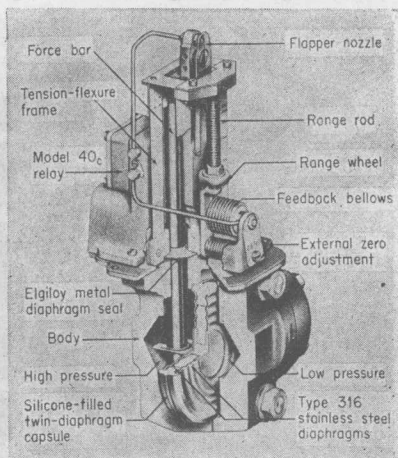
Cutaway view of differential pressure transmitter, pneumatic type. (*The Foxboro Company.*)
